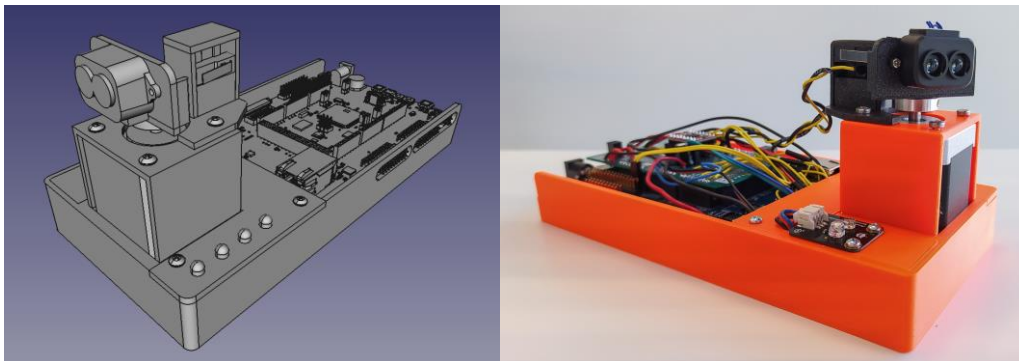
LIDAR instrument: 3D-printed housing design (left), assembled module (right)
